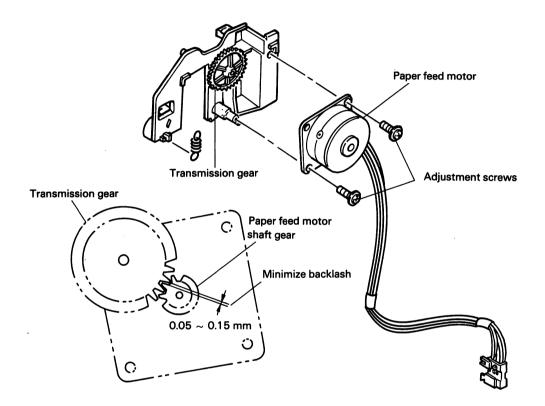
Paper Feed Motor Backlash Adjustment
